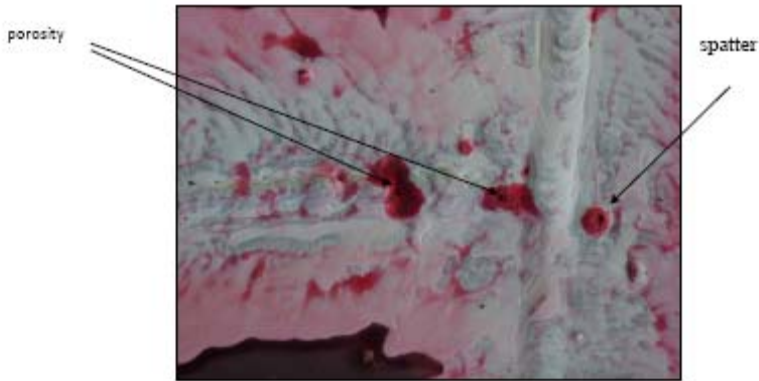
Welding defects- porosity-spatter-roughness.
